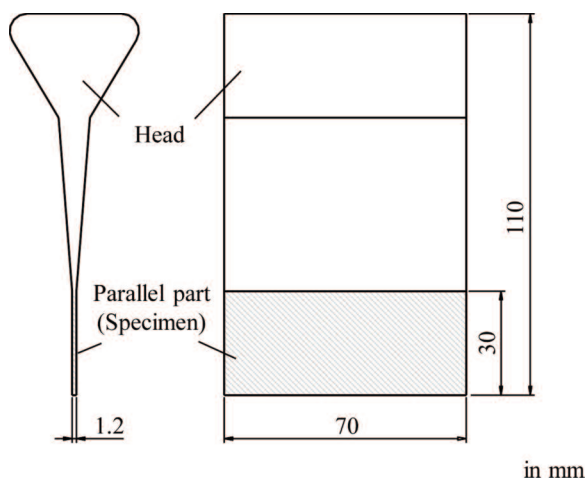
Shape and dimensions of the sample cast in copper mold.
